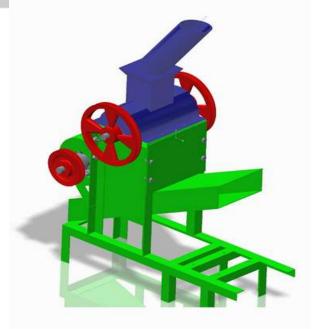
Assembled 3-D model of Simarouba seed extracting machine
